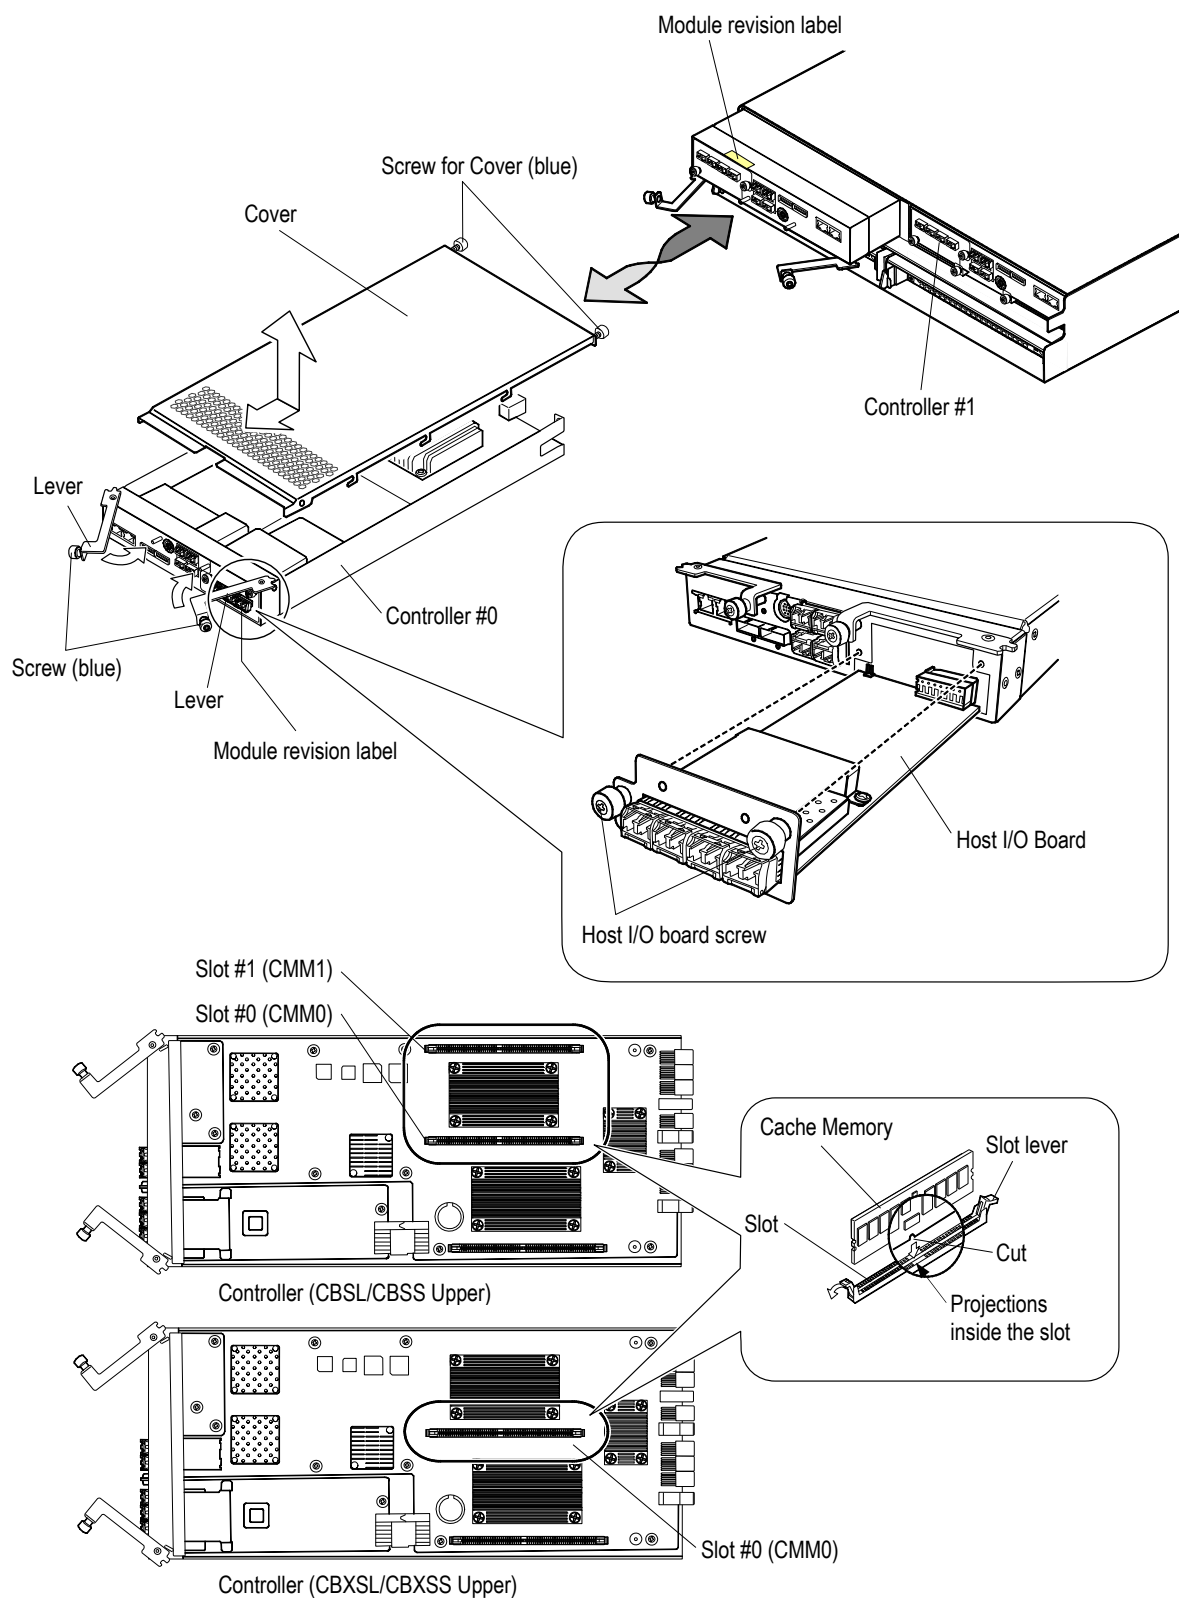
Installing Controller, Cache Memory and Host I/O Board (CBXSL/CBSL/CBXSS/CBSS)
